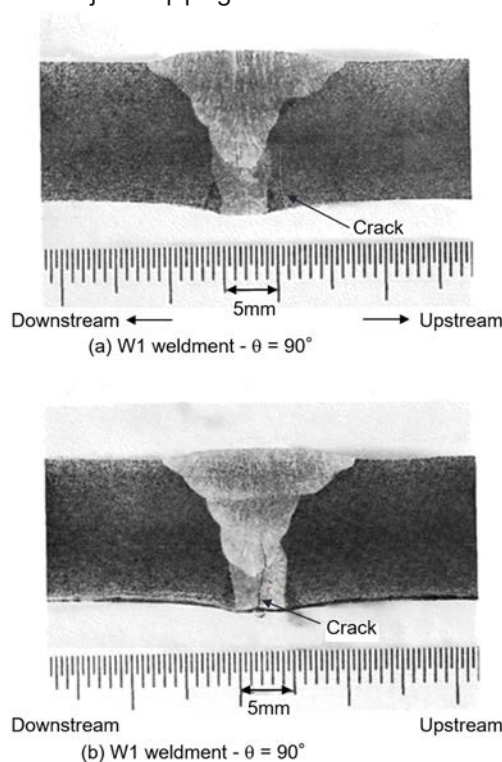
Crack in SUS304 welded joint after thermal fatigue test
